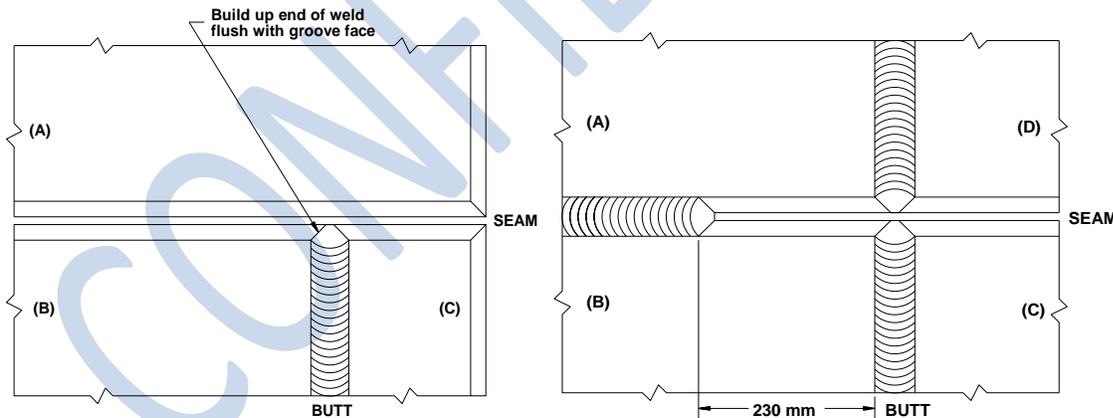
Typical Welding Sequence for Shell Plate Repair
